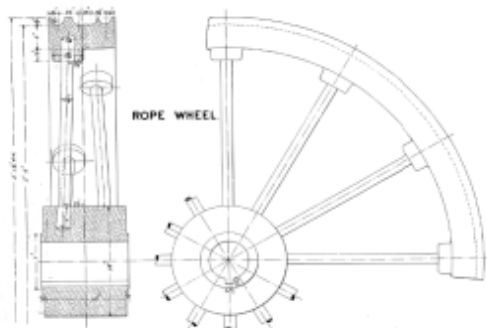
Drawing of sheaves adopted on Barham Bridge
